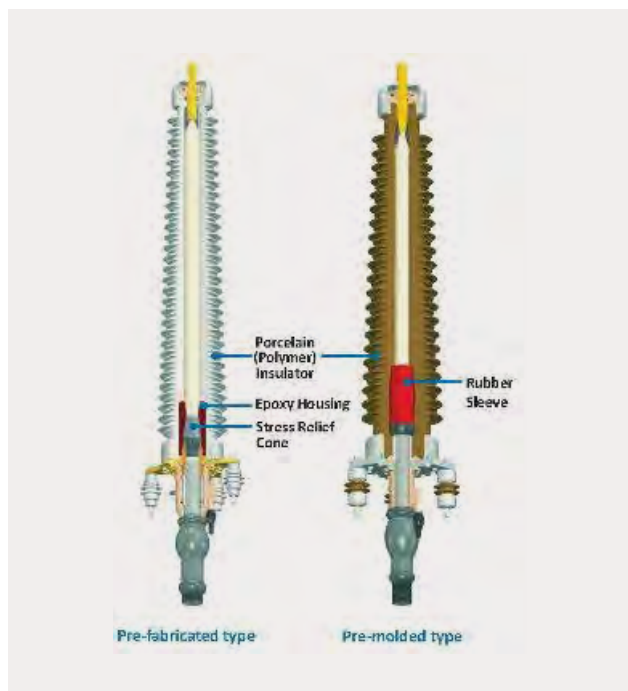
Outdoor XLPE Cable Termination (LS Vina Cable & System¹¹)
